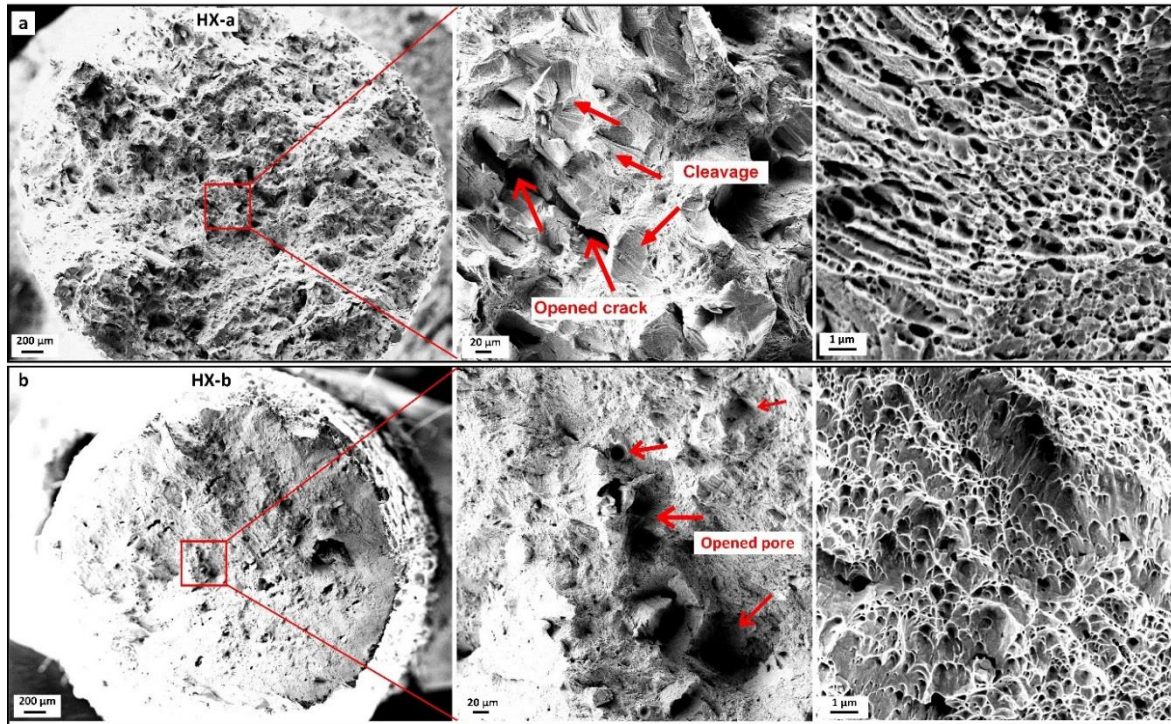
Fracture surface of the HX specimens after tensile testing.
